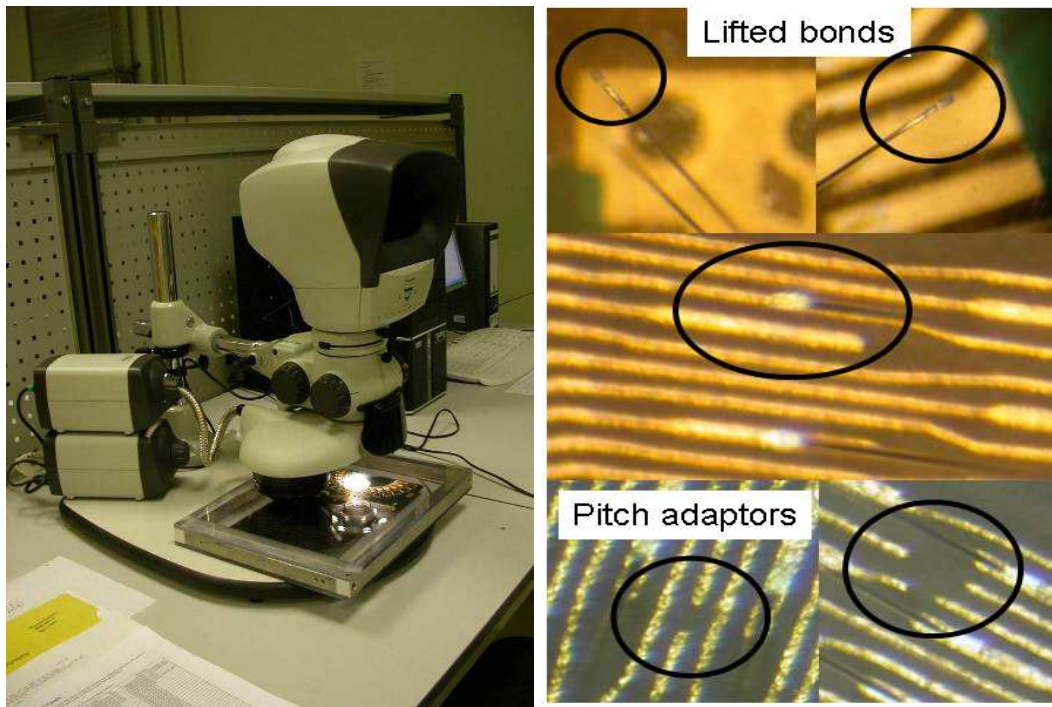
A Lynx microscope equipped with coolpix camera was used to perform the visual inspections. On the left side image a module is shown mounted on the visual inspection frame. Various items were verified on the visual inspection. Lifted bonds and defects on the pitch adaptors seen on the right-hand side picture are typical problems that were found during the visual inspection.
